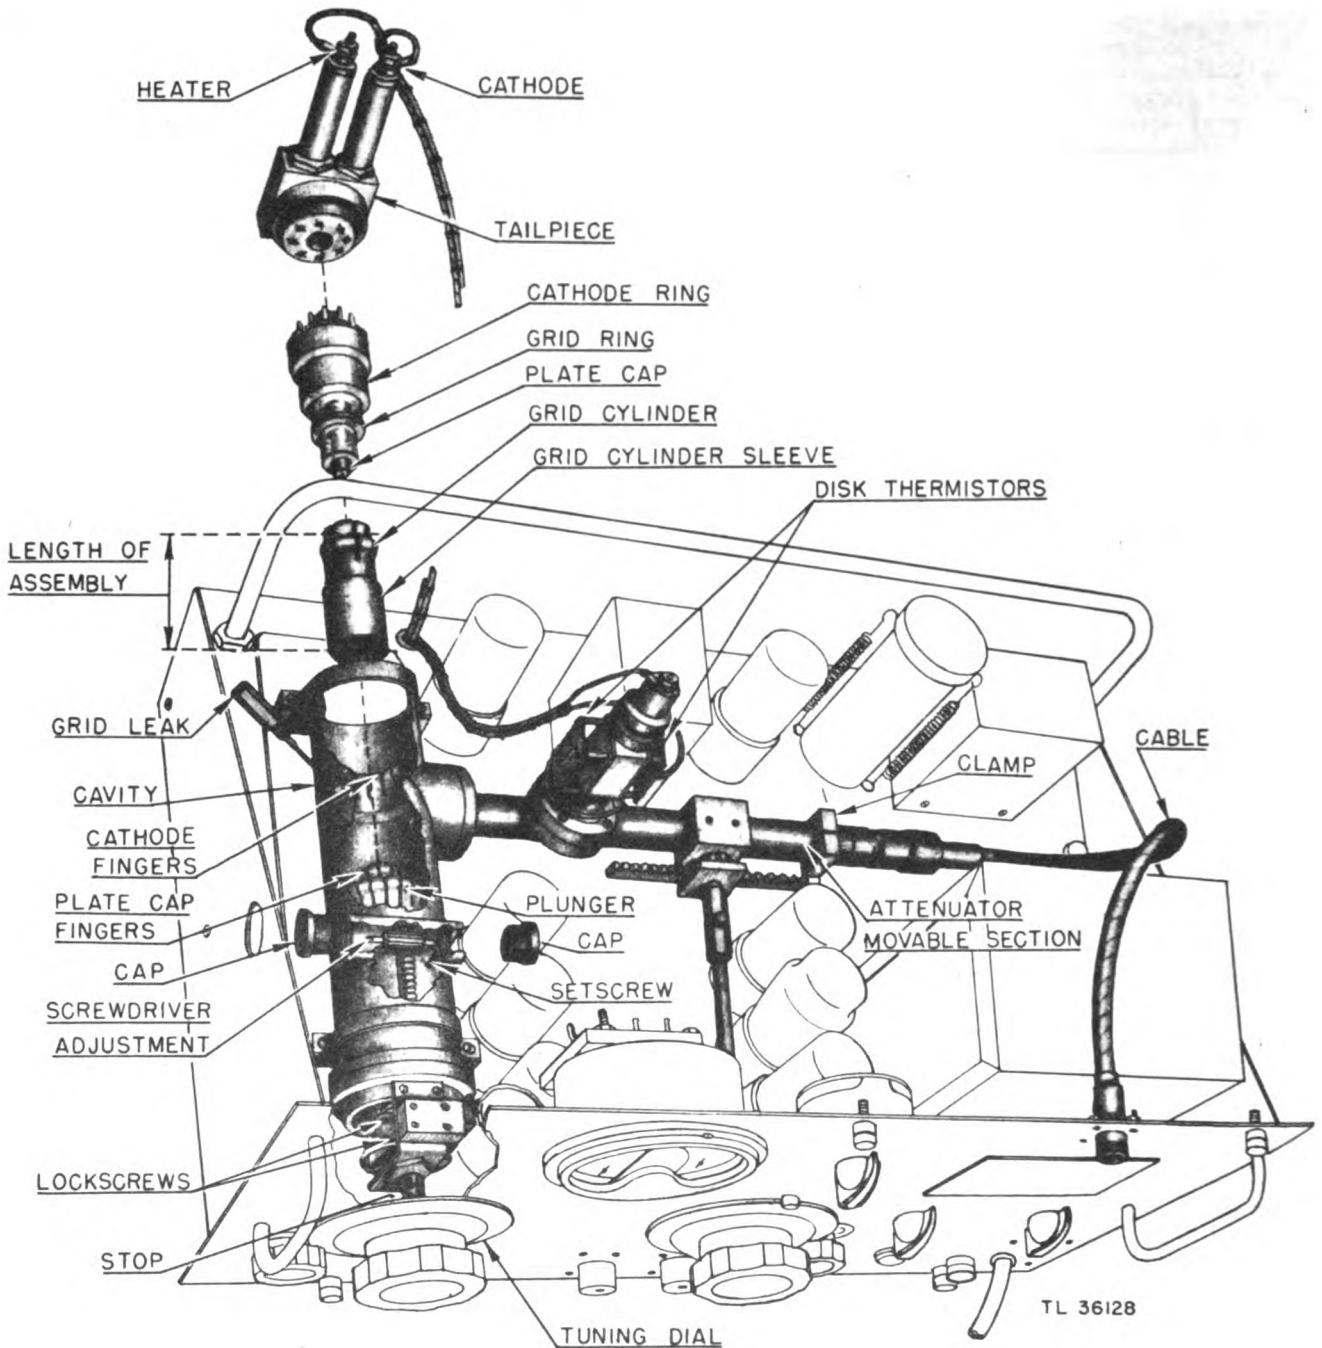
Test Set TS-224/UP, exploded view of cavity.
